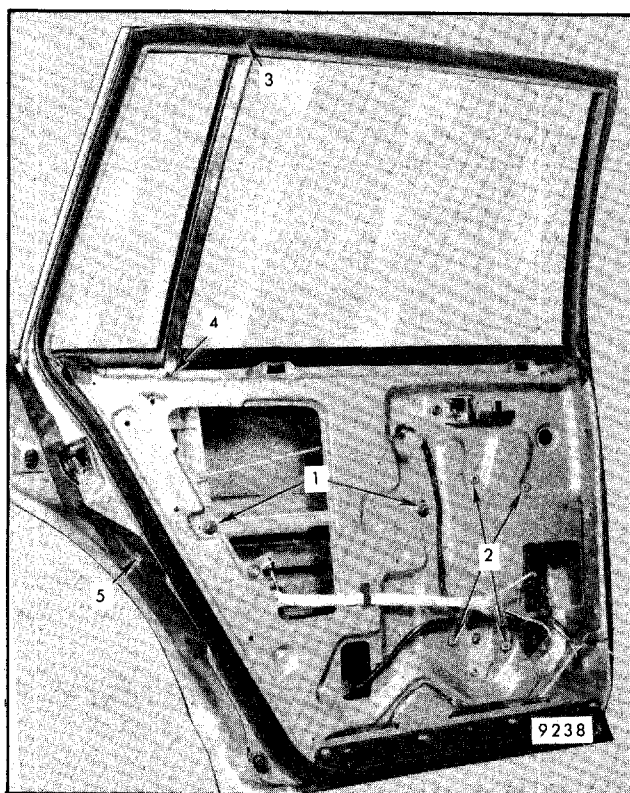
Rear Door Window Hardware - "K" Style
